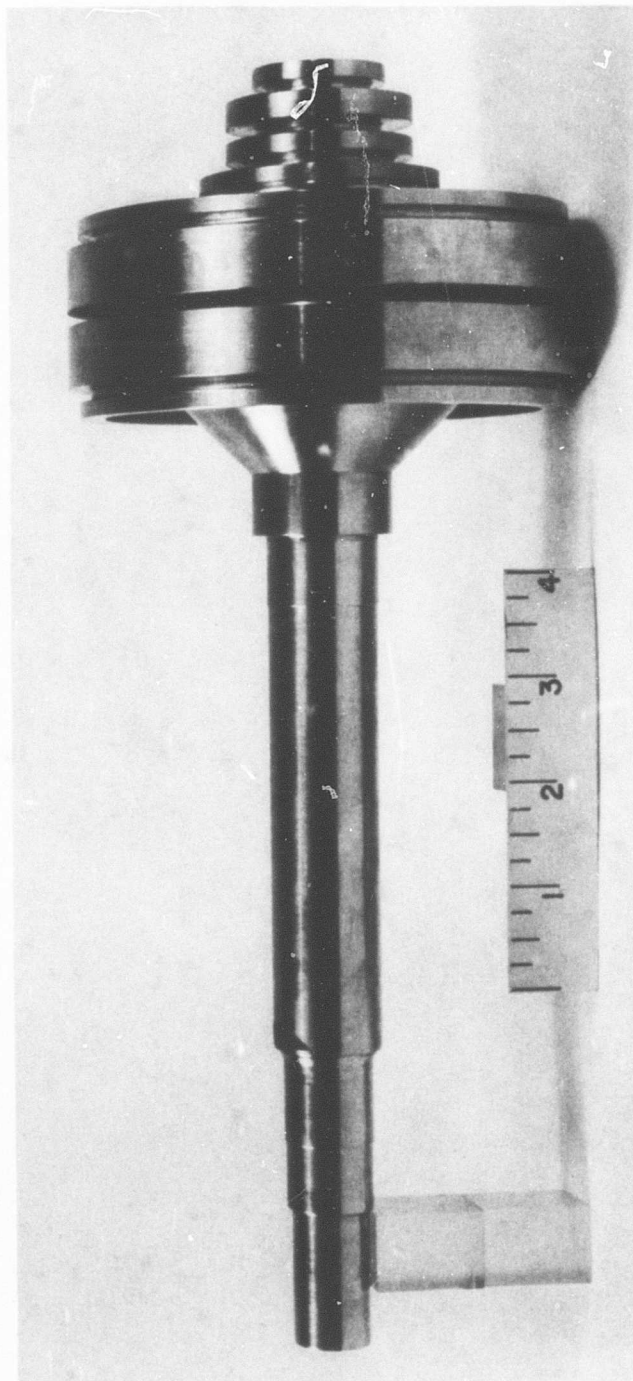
Turbine Rotor Disc Shaft Rough Machining.
